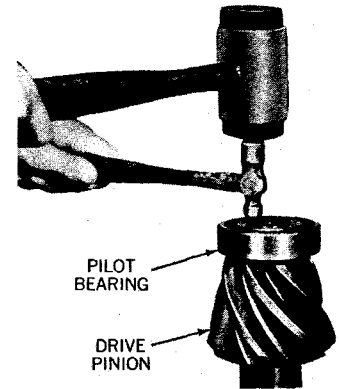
Staking Pinion Pilot Bearing (Stake in four places)
